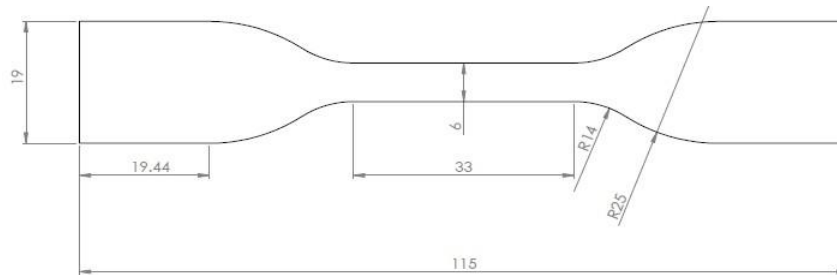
Illustration of ASTM D638 Type IV Tensile Test Specimen [16].
